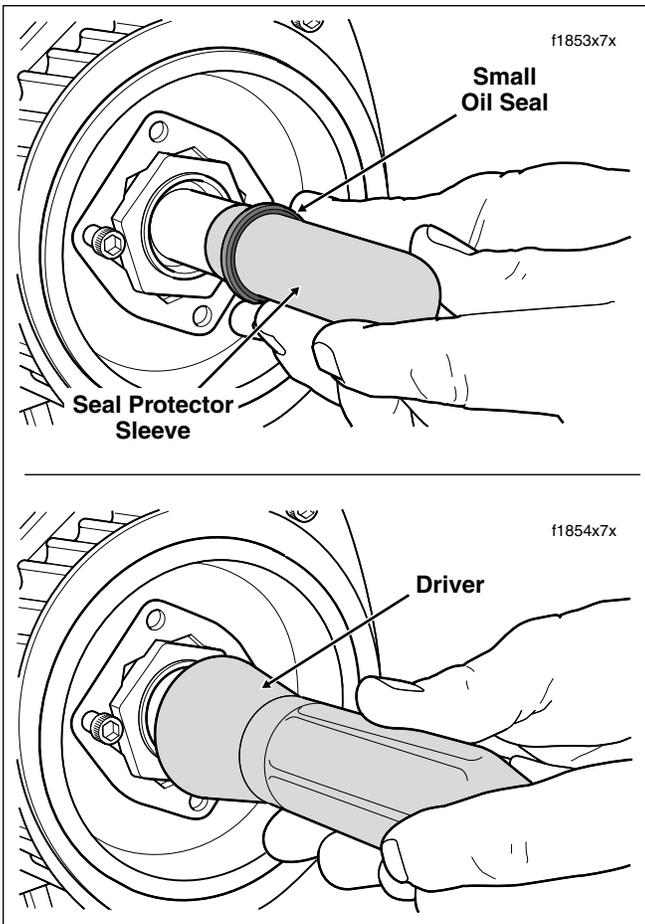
Install Small Oil Seal Using Seal Protector Sleeve and Driver
